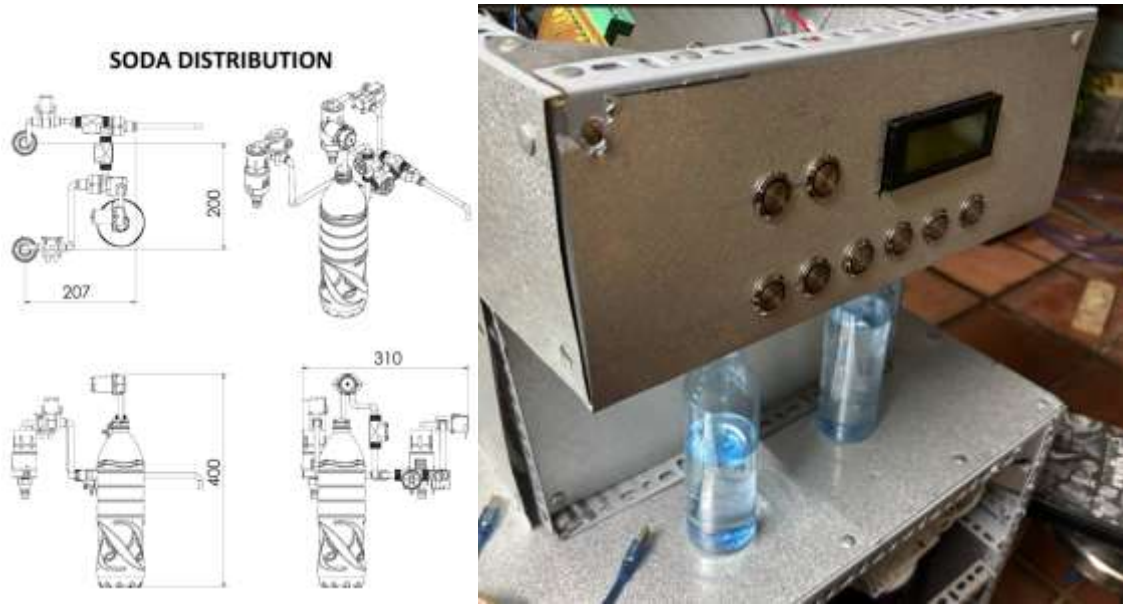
Detail drawing (left) and actual assembly (right) of the dispenser
